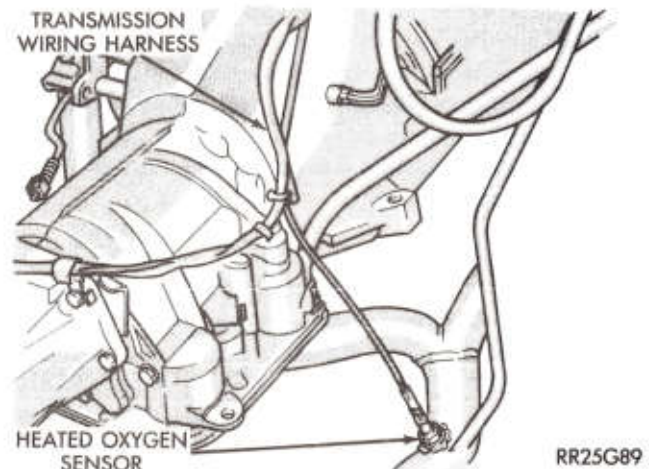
Heated Oxygen Sensor Location 3.9L Engine
